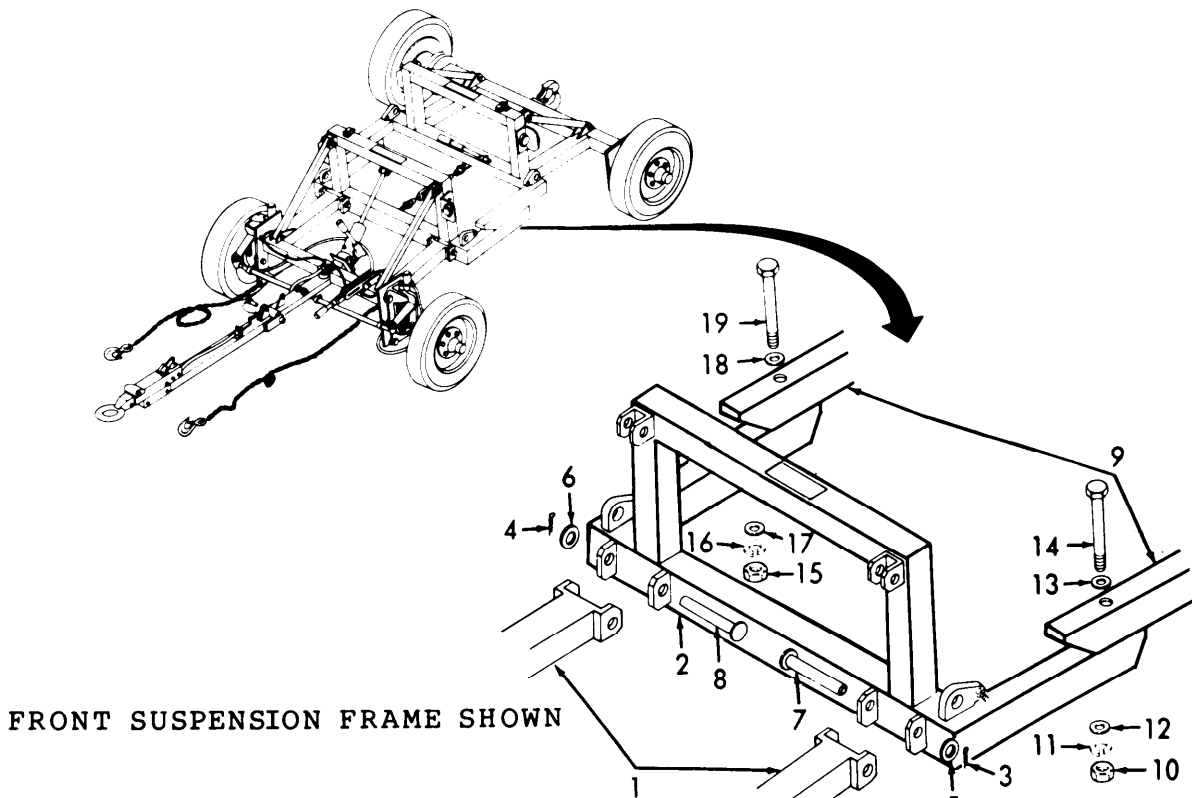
Disengaging Suspension from Axle Frame and Rear Frame.
